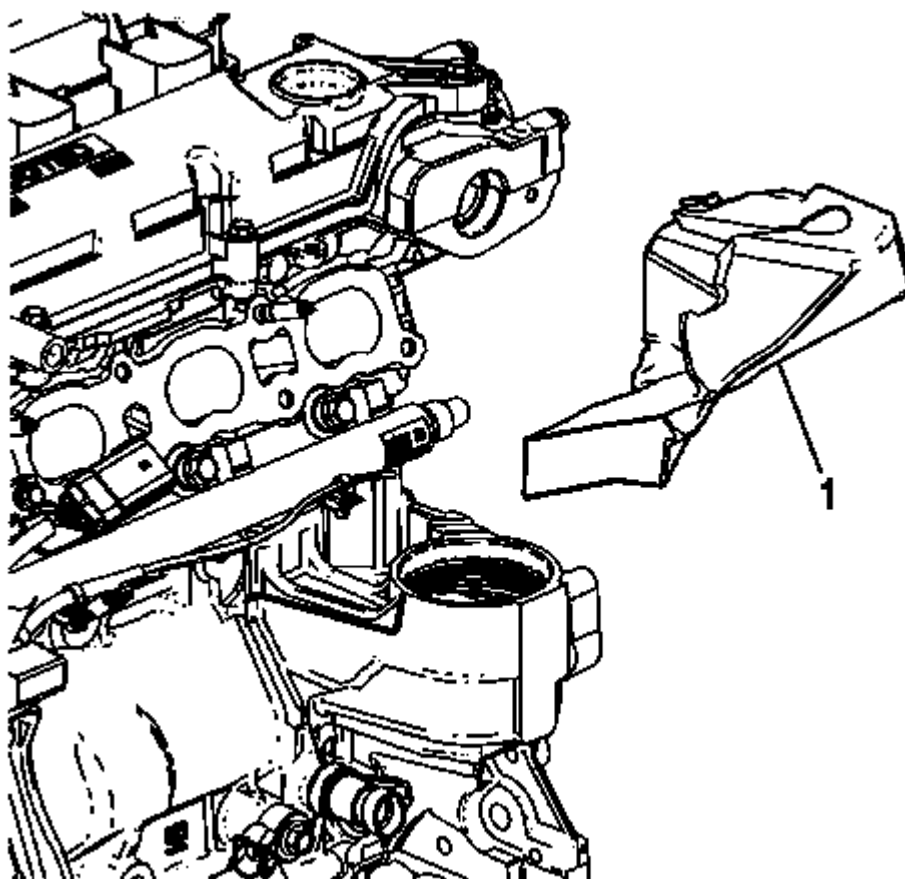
Fuel Injection Fuel Rail Noise Shield
